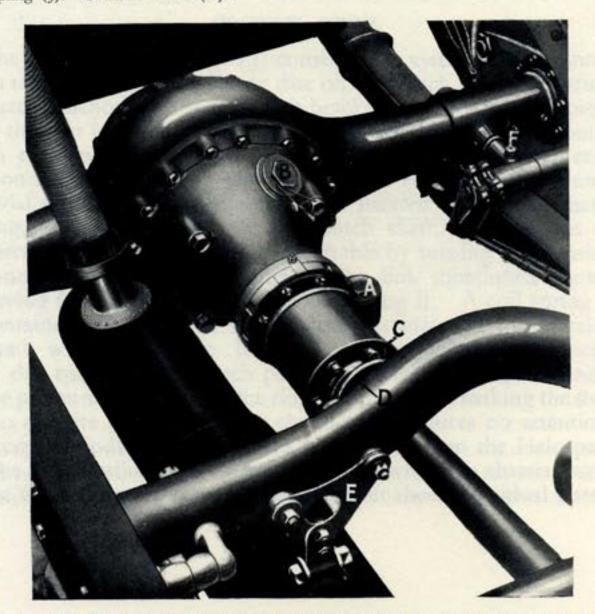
REAR AXLE CASING AND BRAKE CAMSHAFT, REAR UNIVERSAL JOINT OILING POINTS, Back axle filler (A). Inspection plug with seal (B). Pot joint oiling nipple (C). Protecting flange (D). Flexible silencer bracket (E). Brake camshaft oiling nipple (F).
